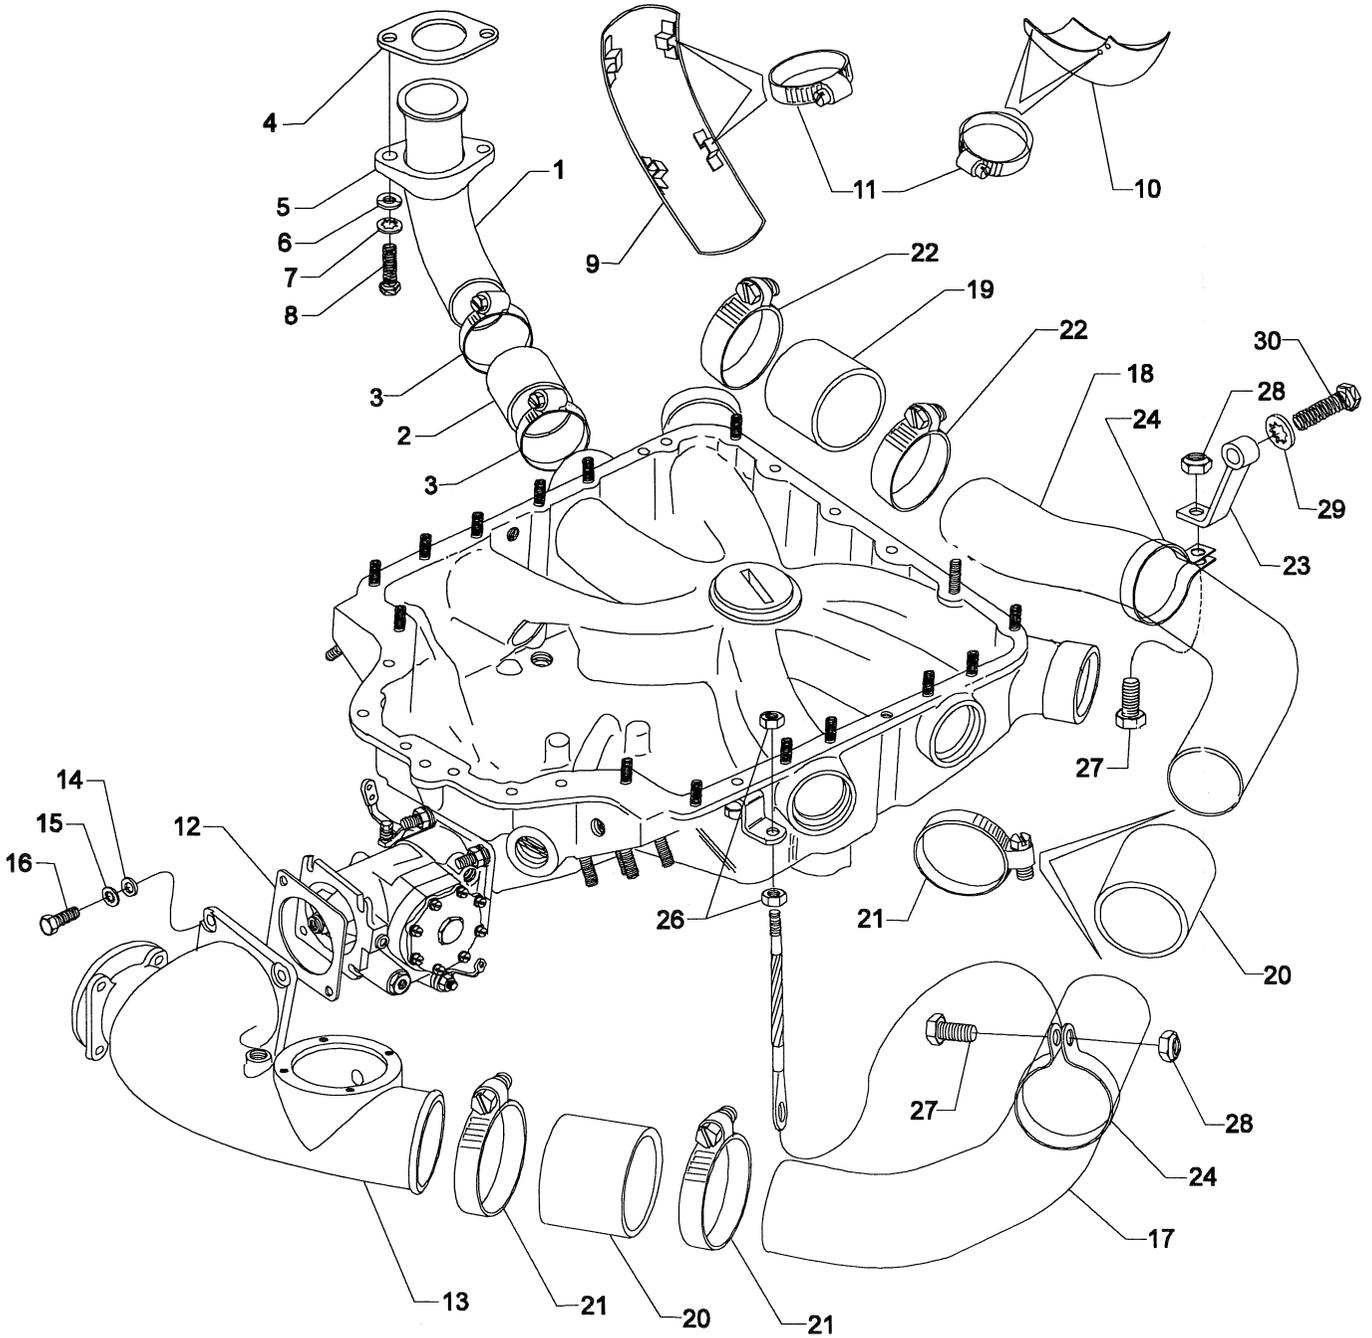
INTAKE PIPES, HEAT SHIELDS AND AIR INLET DUCT
